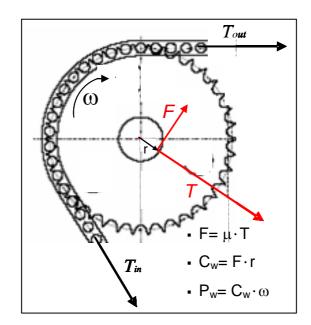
Friction lost in the support bearing of the cam shaft due to the chain draught.
